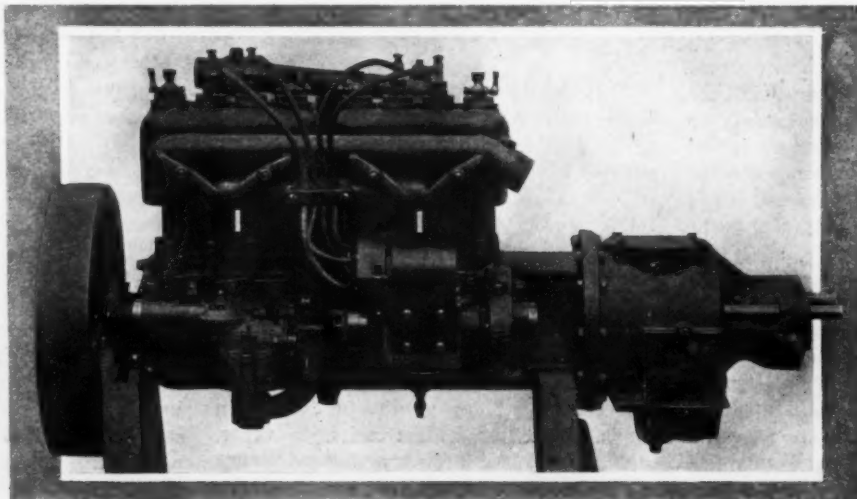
Left side of the motor, showing magneto, fan in the flywheel, sliding gear system, Breeze carburetor, and unit construction
